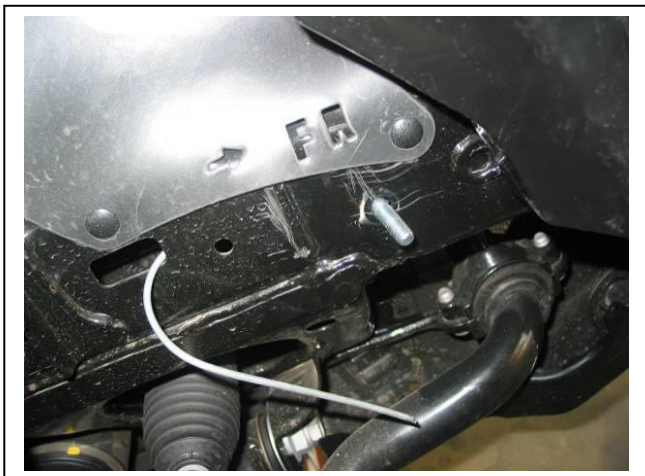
Rear bolt on wire fitted before mount is assembled for photo
